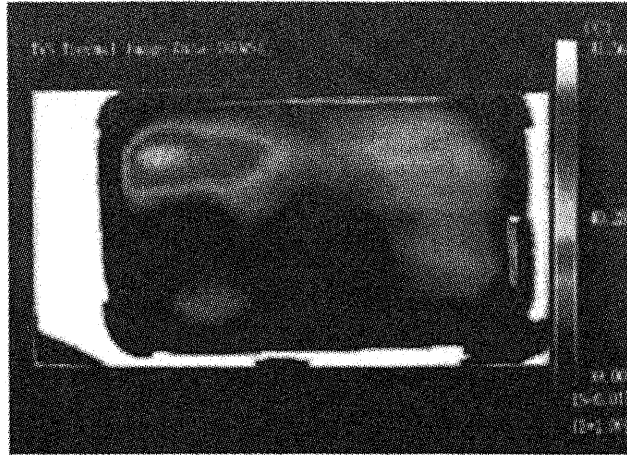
Thermogram of aluminum surface sheet specimen
